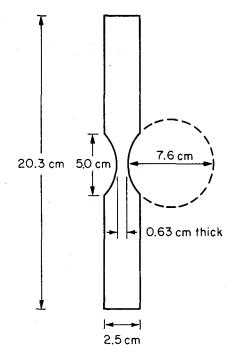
Fatigue specimen dimensions, $\frac{1}{4}$ in sheet.
